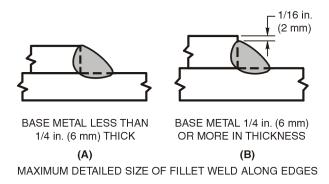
Details for Prequalified Fillet Welds (see 2.4.5)
